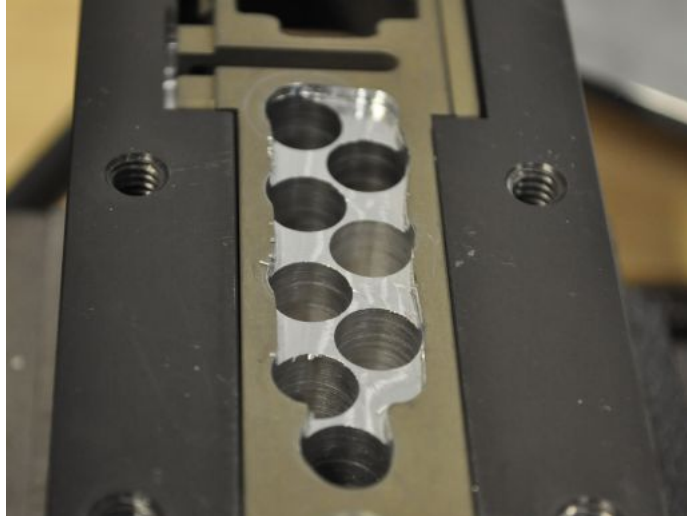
Polygon formed without the end-mill touching the jig (1/16" approx. gap)
